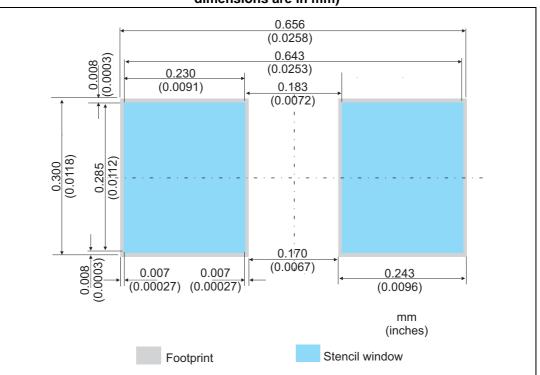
Recommended stencil windows-opening 90%/Thickness 80µm (all dimensions are in mm)
